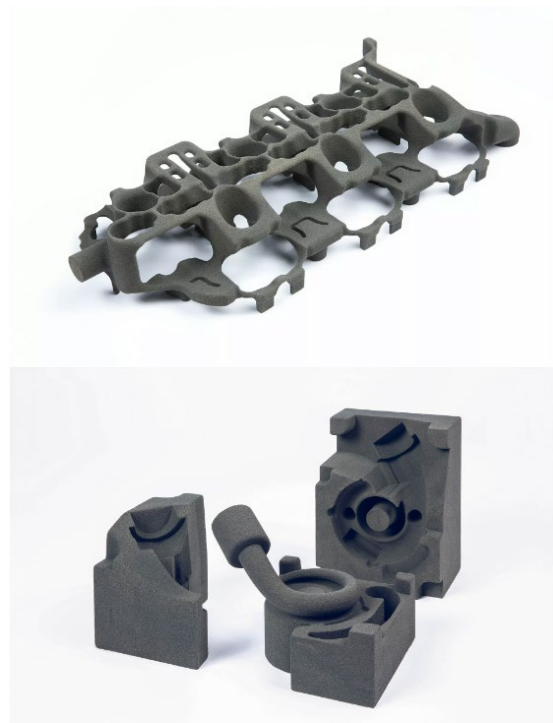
3D printed sand casting cores and 3D printing molds for casting metal, respectively [7].
